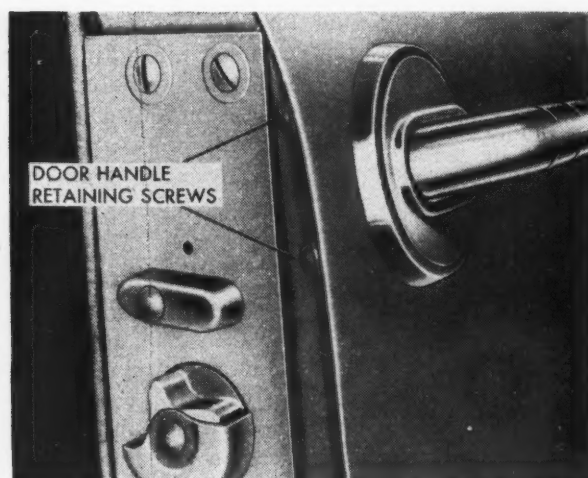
Outside door handle is removed by taking out the retaining screws shown here.
